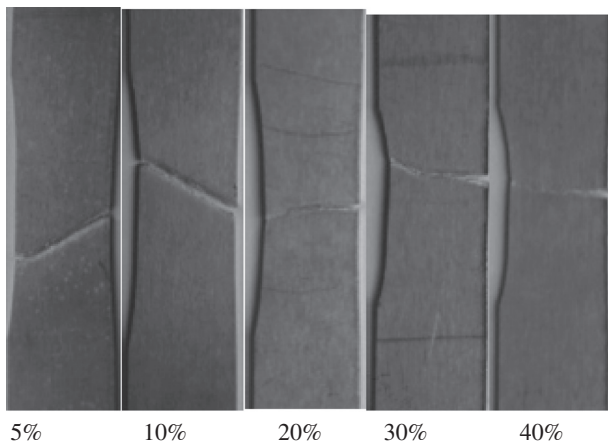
Pictures of samples after final fracture of smaller gauge length half dog-bone samples with different cutting clearances.
